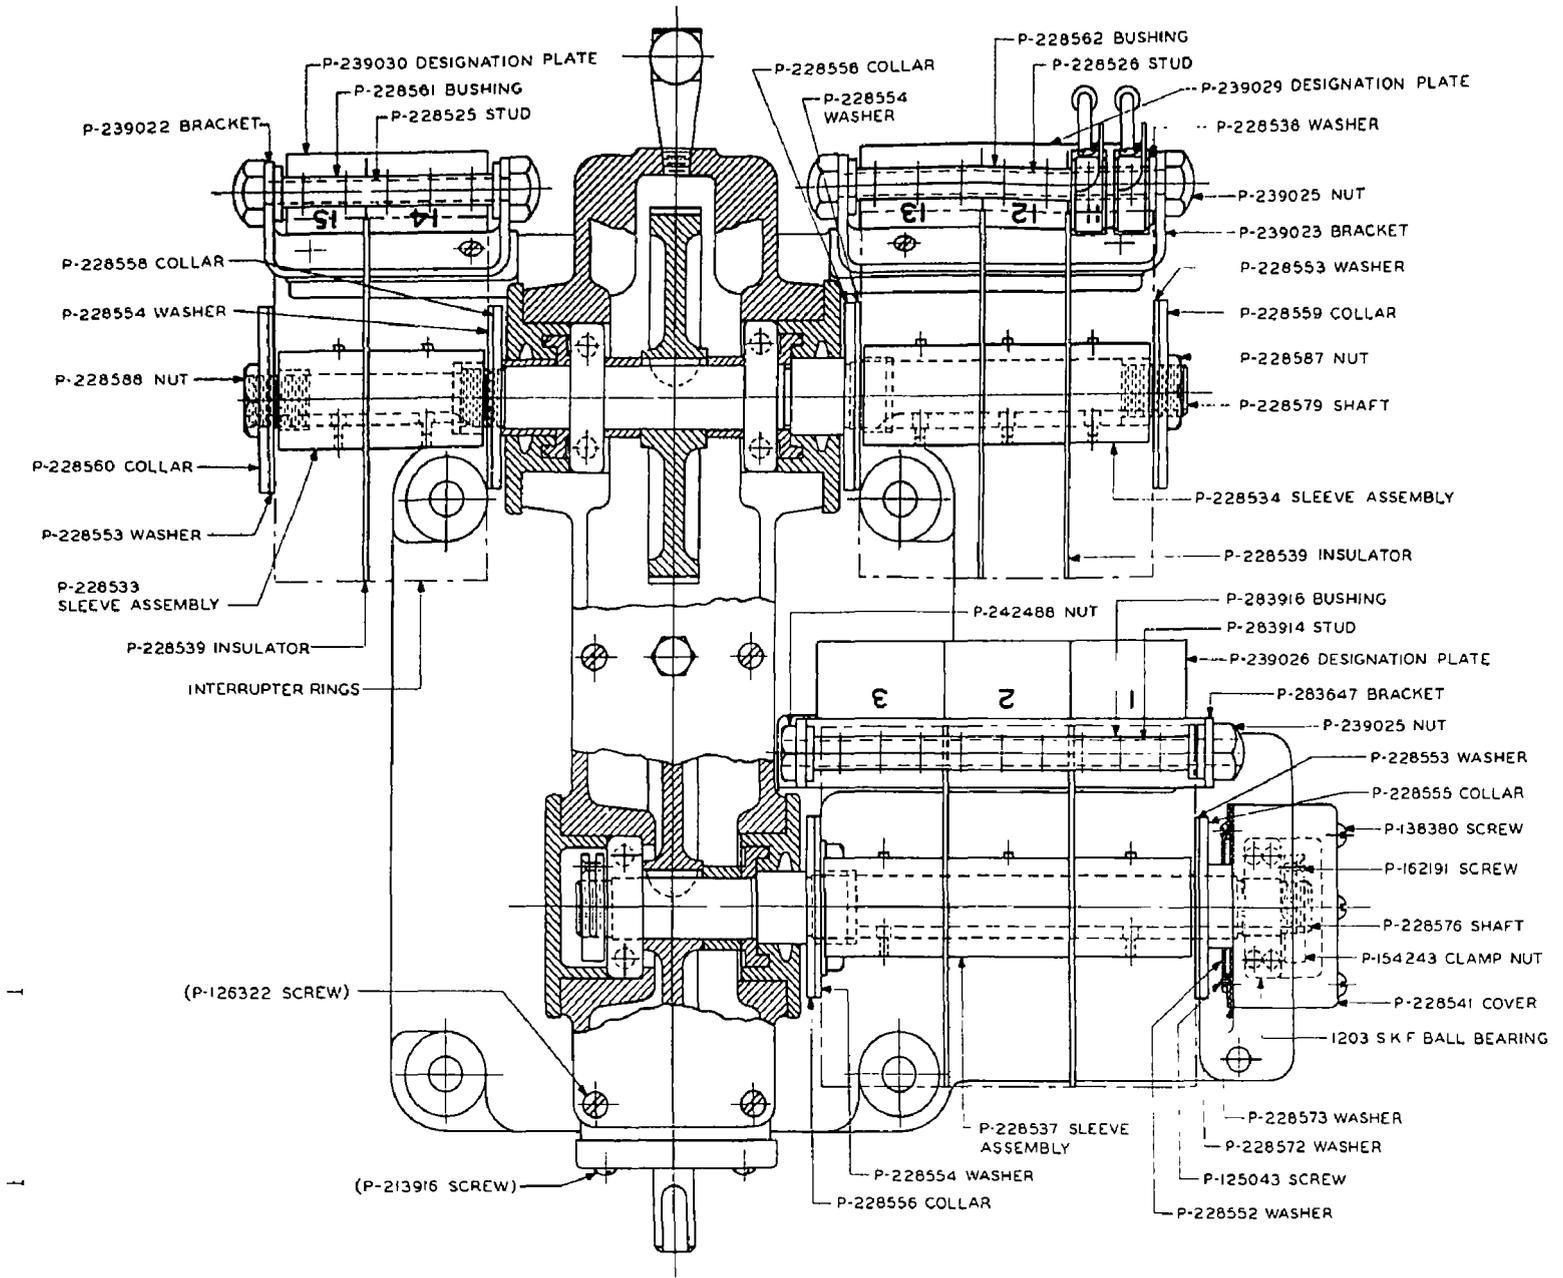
2A Interrupter Mounting—Top View (For Side View See Fig. 10)
